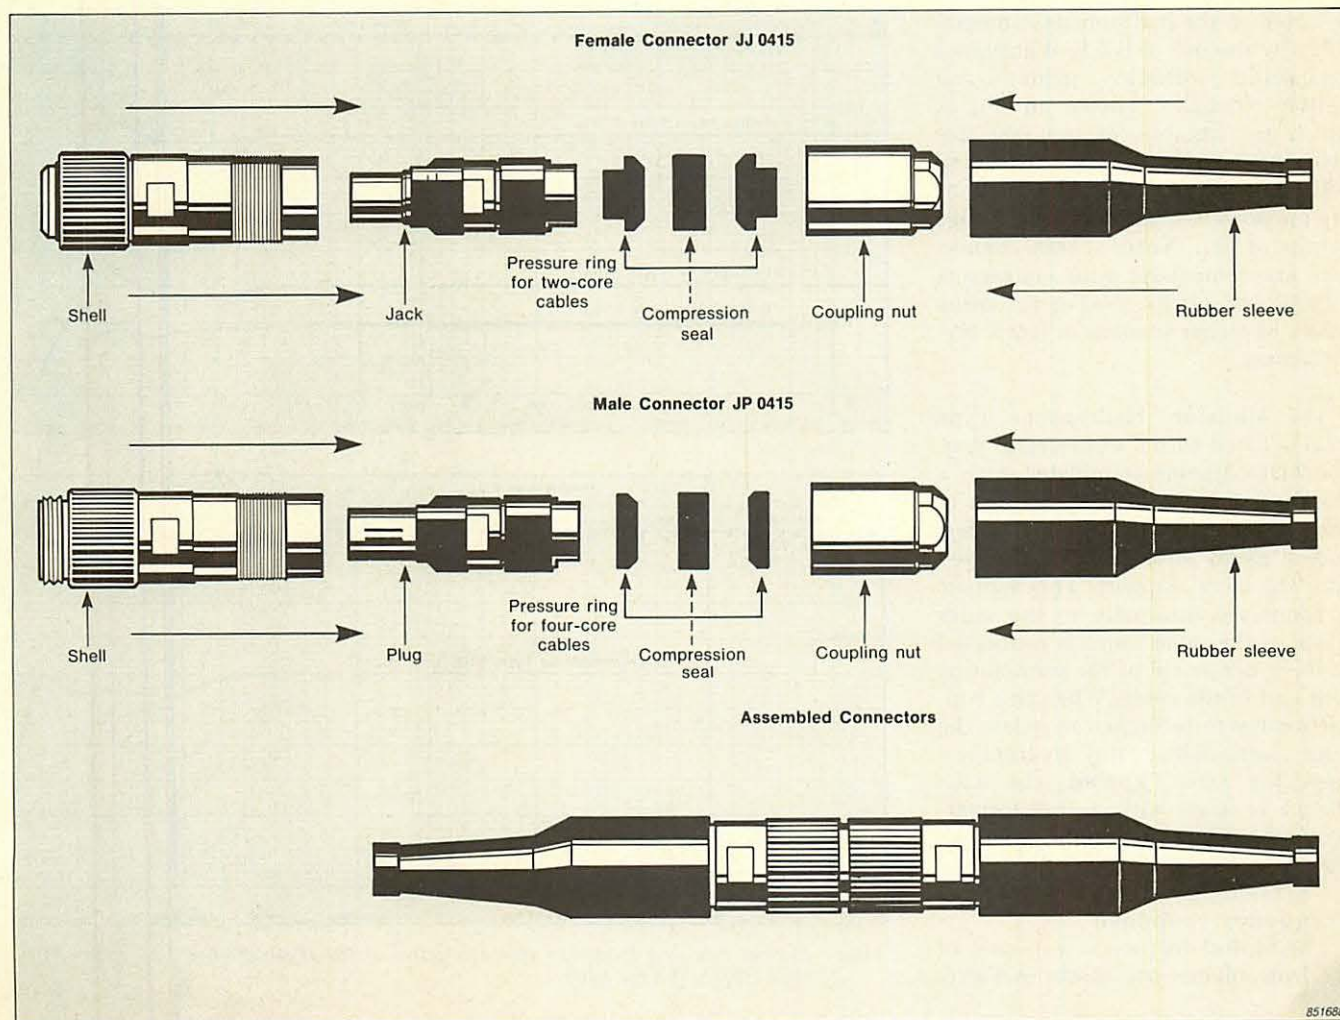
Exploded view of B&K Waterproof Connectors JP0415 and JJ0415
